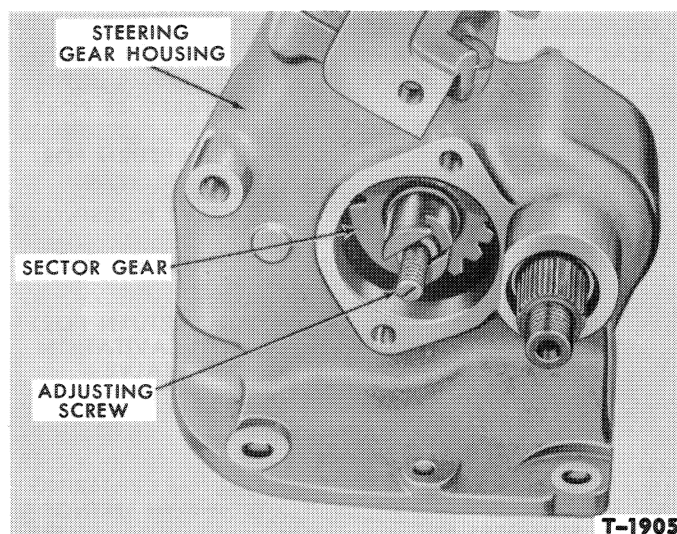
Steering Gear Housing with Sector Shaft Cover Removed
